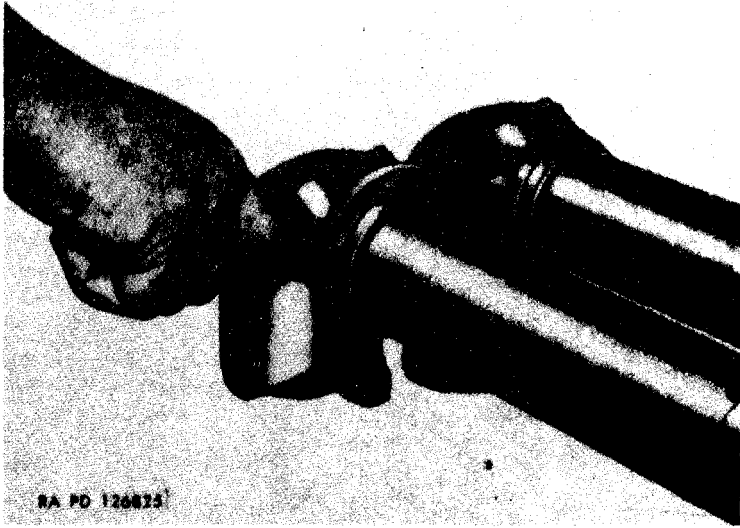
Using spanner wrench 41-W-3249-740 to remove head assembly C82516.
